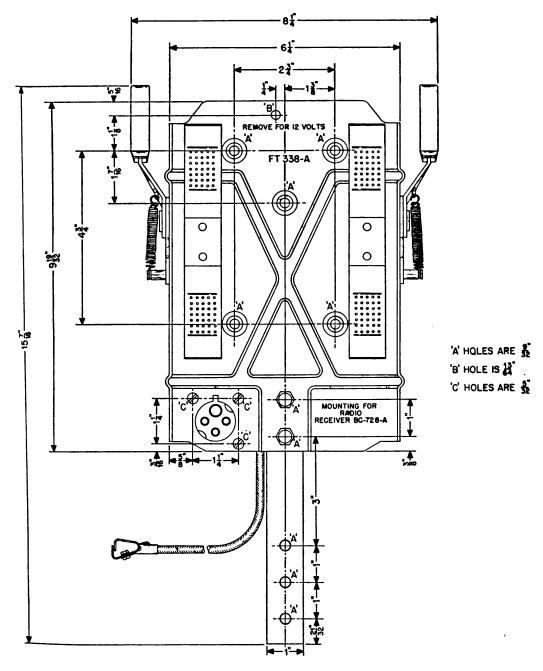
FT-338-A, Outline Dimensional and Mounting Hole Location Detail
